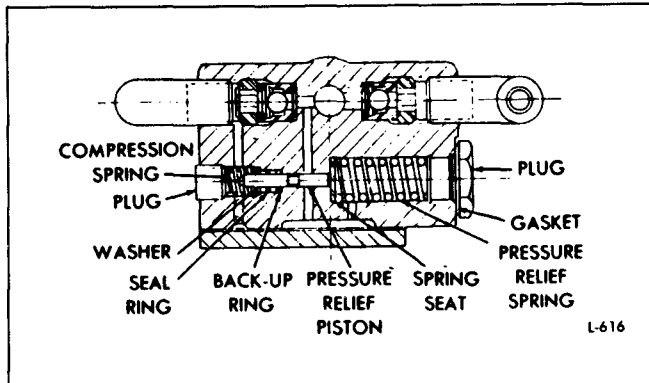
Engine-Driven Hydrostarter Charging Pump Pressure Relief Piston Assembly
